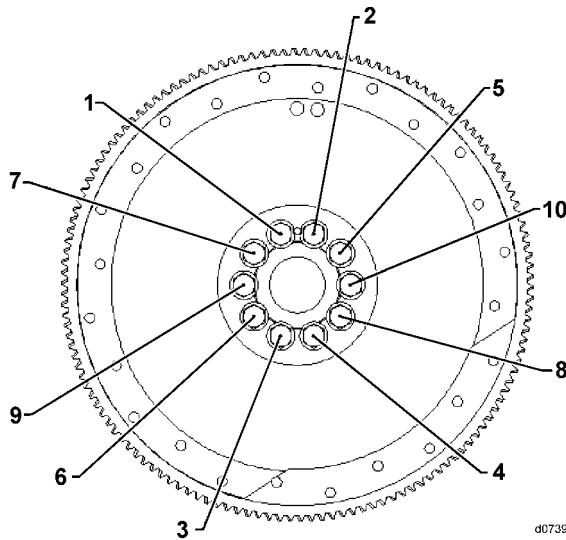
Typical Flexplate and Flywheel Torque Sequence
